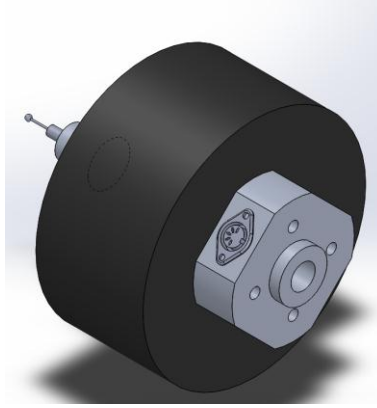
Back view of sensor fixture showing the five-pin plug on the flat face of the flange.
